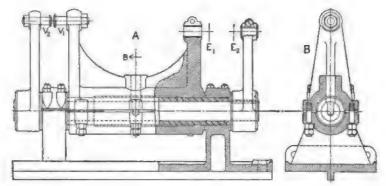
Double Rocker, to Drive the Valves in Fig. 440.
